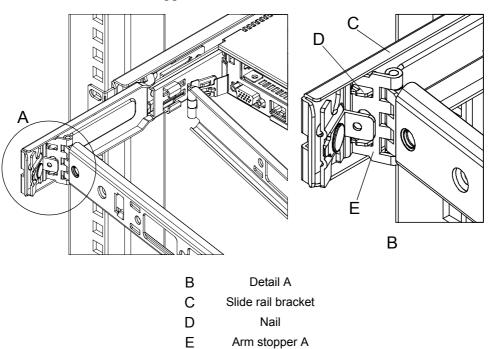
12: Hooking the Arm Stopper A on the Slide Rail Bracket
